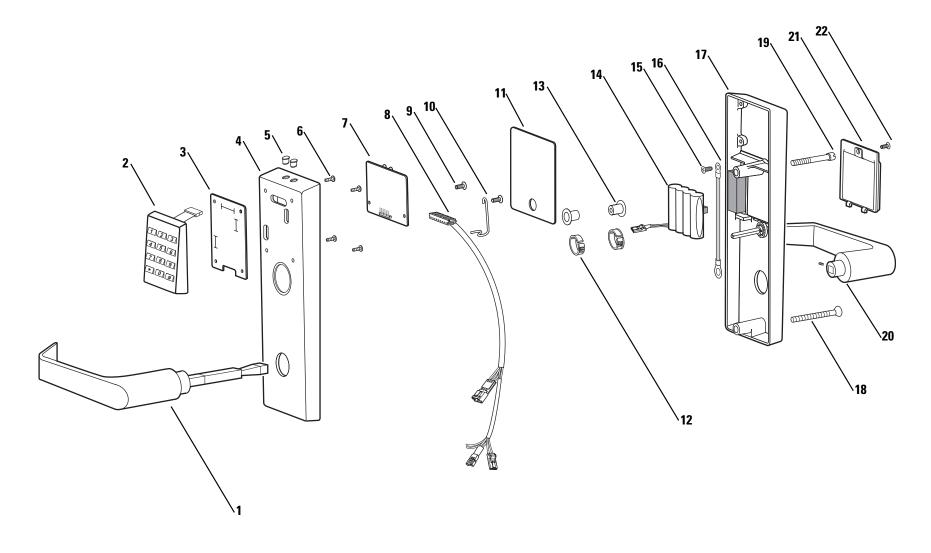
Keypad EZ reader and trim exploded diagram (mortise shown)
